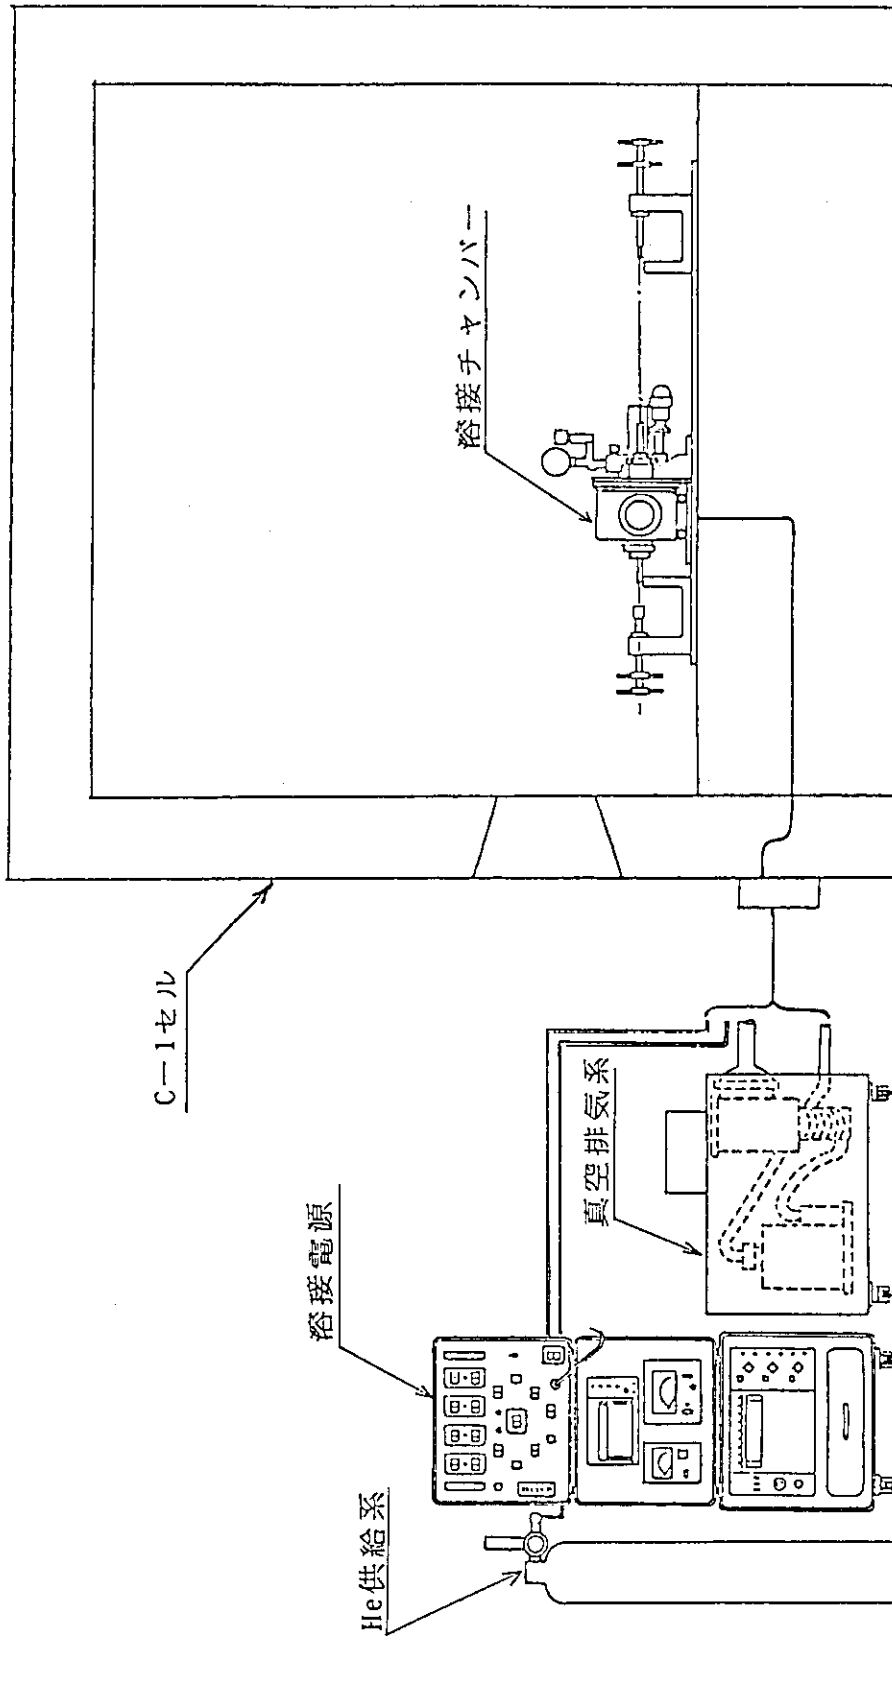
Remote End-plug Welding Machine
